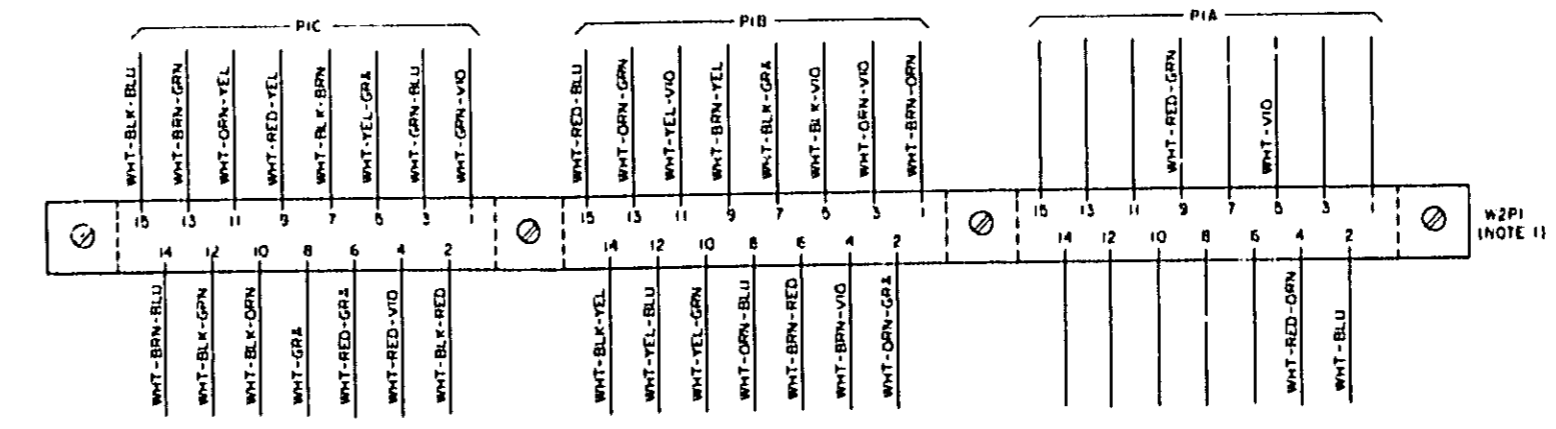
Option 004, Remote Programming Cable Assembly and J10 Option 003, Digital Recorder Cable Assembly
